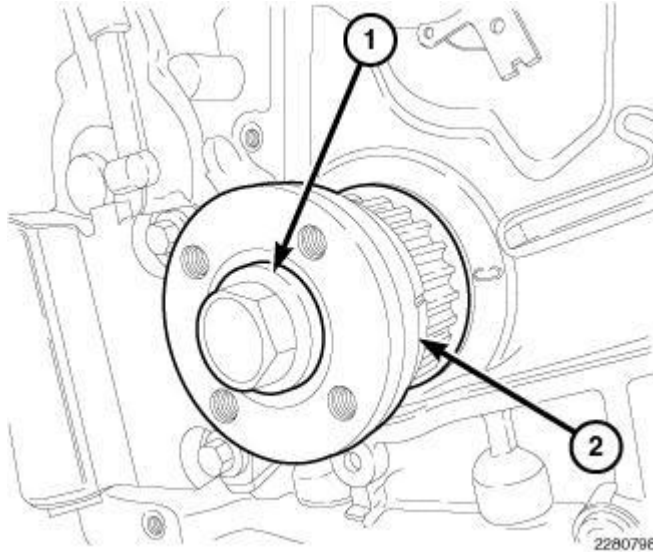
Crankshaft Timing Belt Sprocket & Bolt
